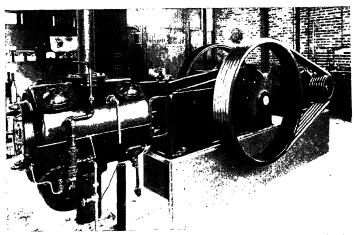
Power for air-driven tools. The electric motor through the V belt drives the air compressor. The compressed air is taken through pipes to air-driven equipment. (Allis-Chalmers.)
